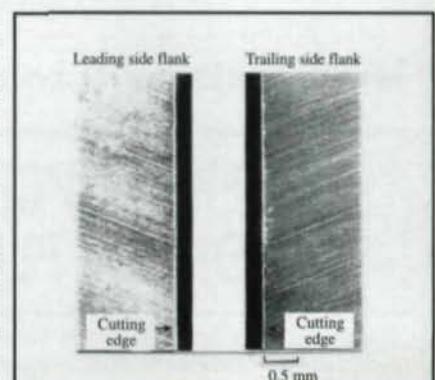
Wear patterns on flank of hob G after cutting 16 induction hardened gears.
